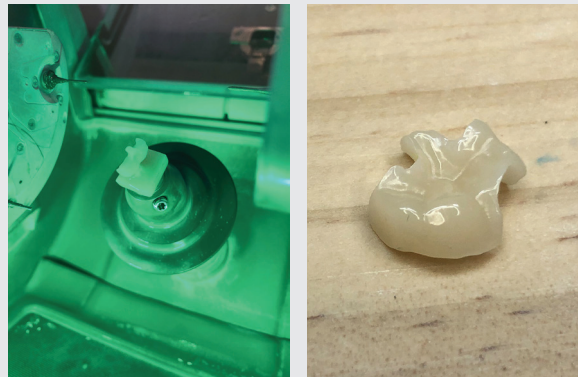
Vita Enamic Block was machined using a Cerec MCXL (Dentsply Sirona) milling machine. For complex onlay restorations, it took about 15 minutes. Image of the polished restoration after removal of the sprue.
